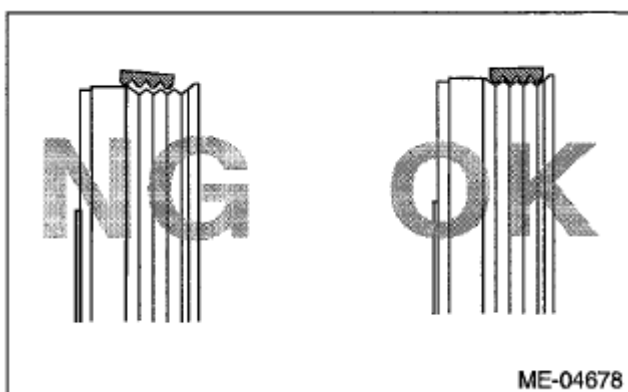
Identifying Correct And Incorrect Installation Position Of Rear Side Belt (A/C Compressor Pulley)
